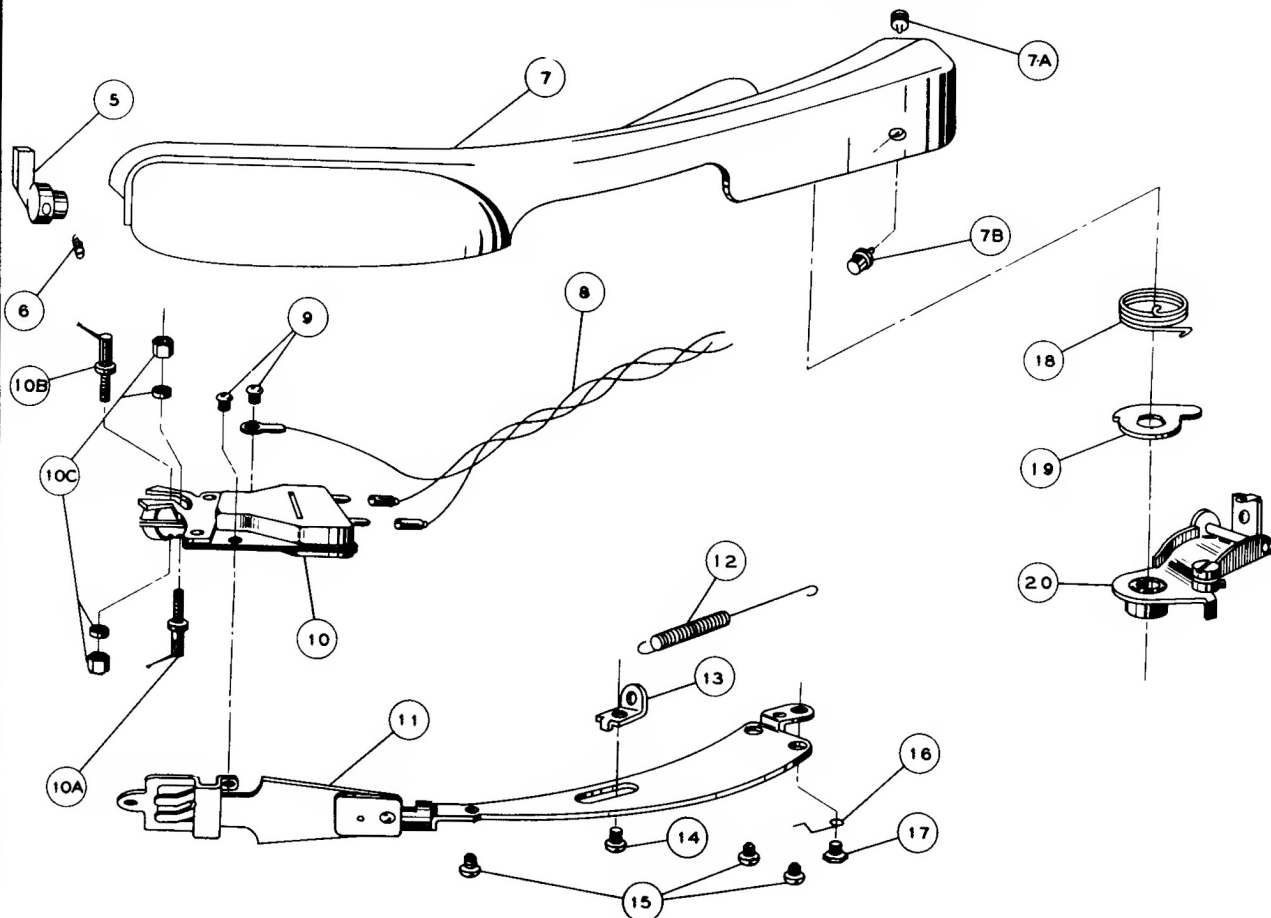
Pickup Arm Assembly for 930409-5 and -10
